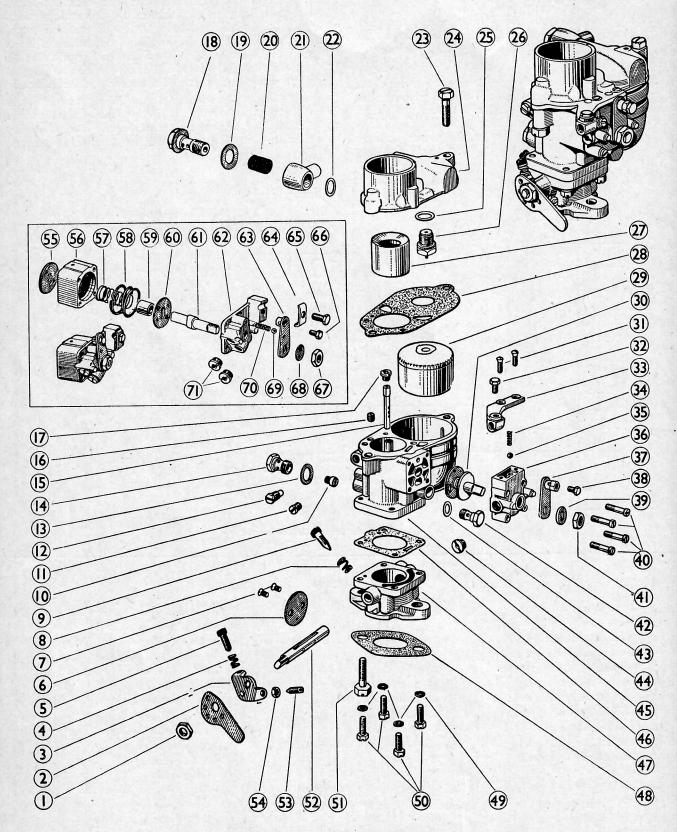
Exploded view of the Solex 30FAI carburetter.
